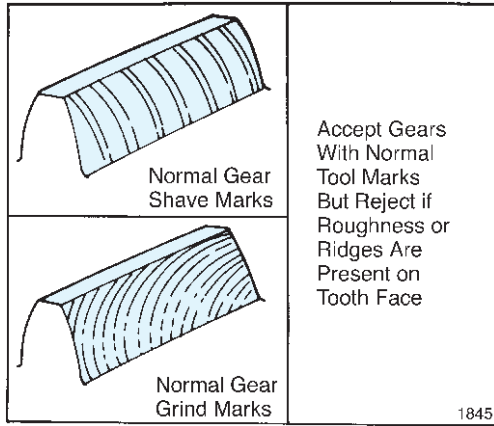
Normal machine marks on gear teeth are not cause for gear replacement. (Courtesy of BWD Automotive Corporation)
